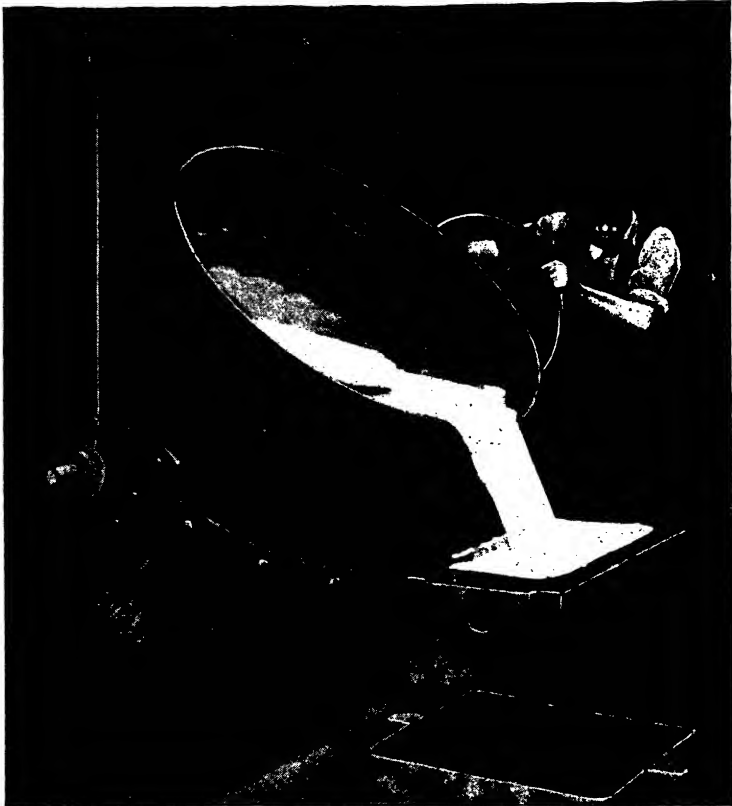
A. POURING THE METAL INTO A LARGE MOULD
